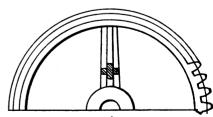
CONVENTIONAL METHOD OF DRAWING GRAR WHEELS.
